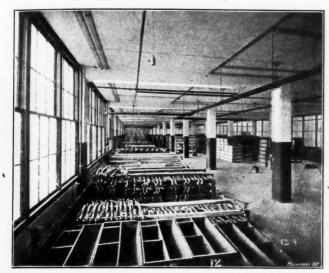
View of Stock Room, showing Trucks in which Parts are taken to the Assembling Room, Assembled Parts, and Bins in which Smaller Parts are Stored
